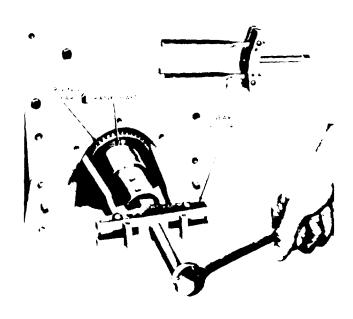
E-9. Removing Oil Pump Driving Gear from Crankshaft
